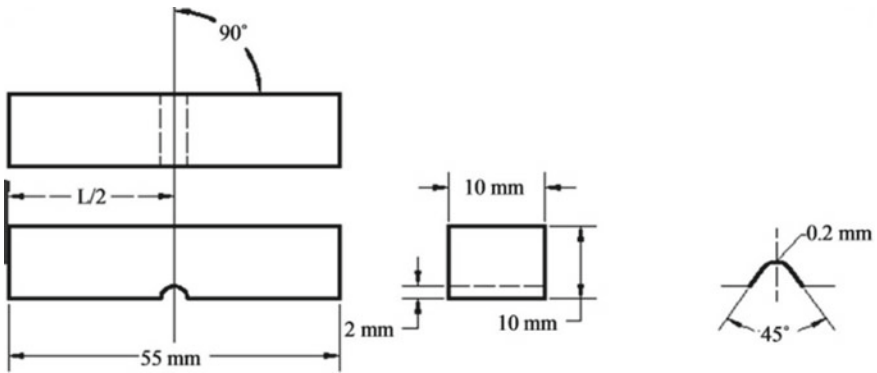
Geometry of Charpy test specimen as per ASTM E23-18
